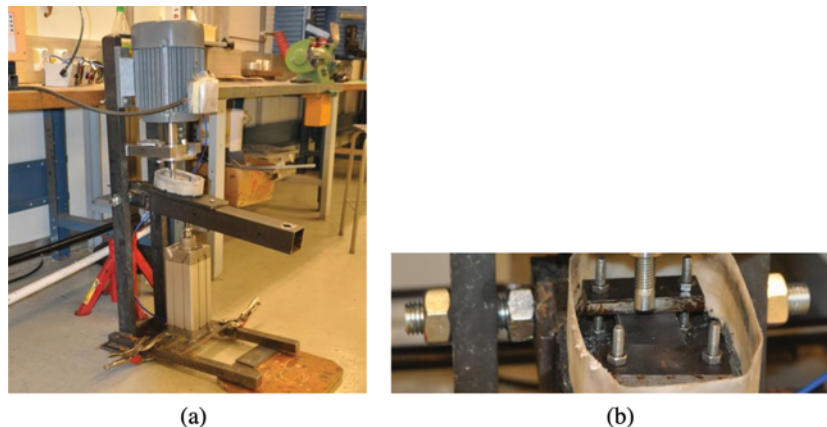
(a) Prototype of the FRSW test rig and (b) a container to immerse the welding zone.
